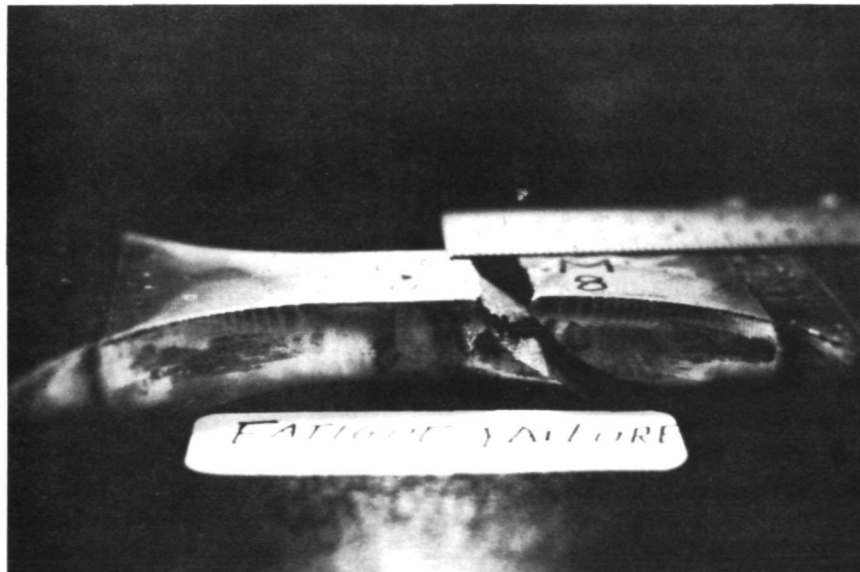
Typical example of MP35N test specimen fatigue failure.
